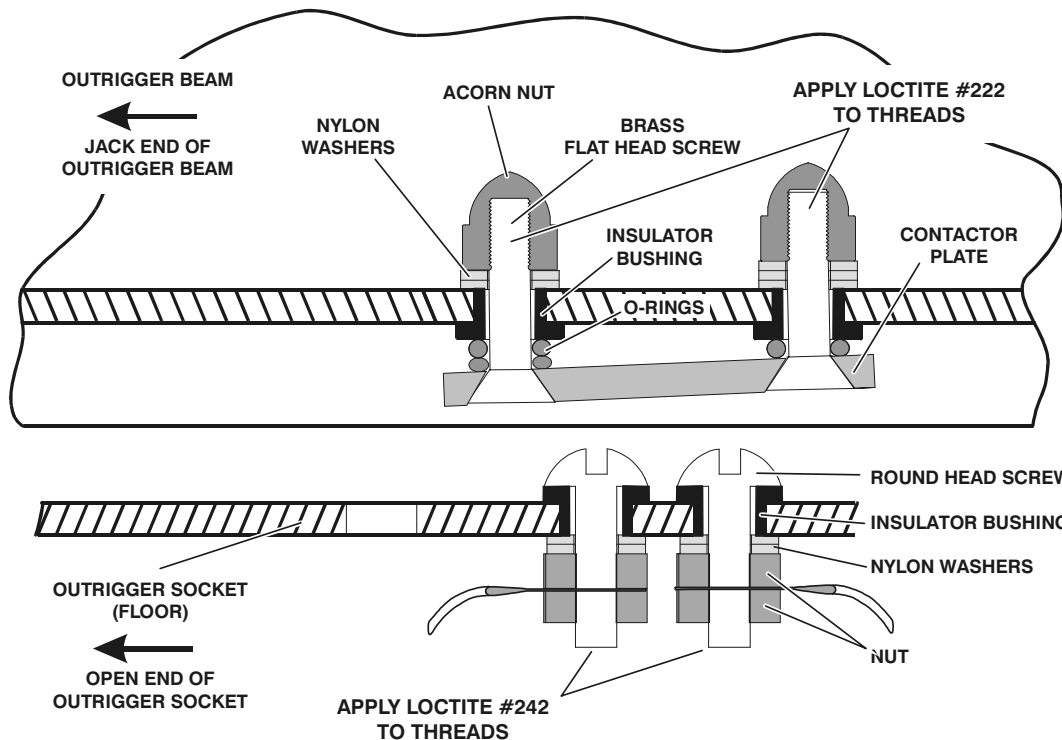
Outrigger Socket Contactor Heads and Outrigger Beam - Contactor Plate Mounting Hardware (ORIGINAL AND 5/2001 - DESIGN).
